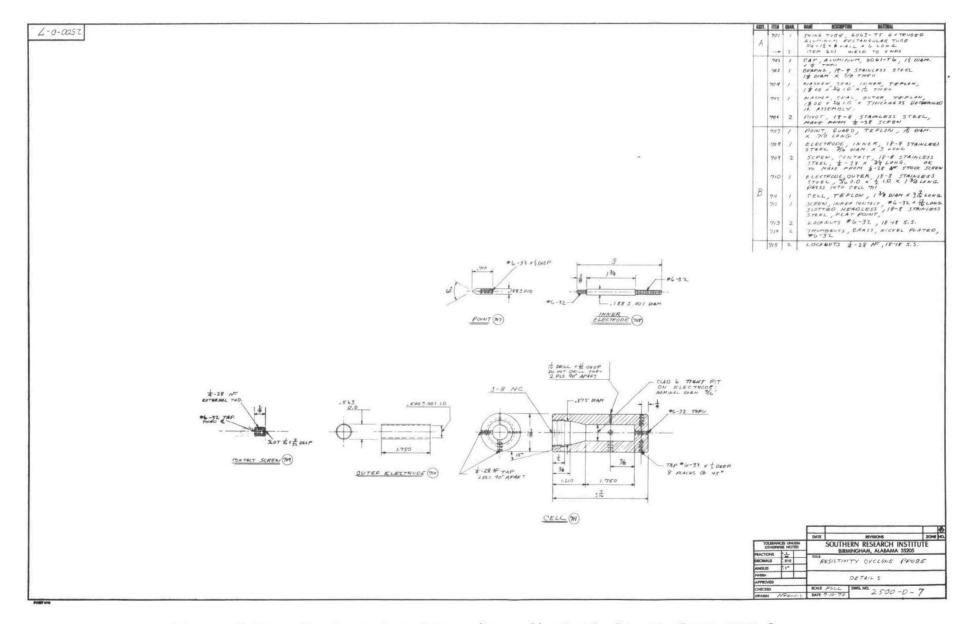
A. Engineering dimensions (inches) for Cyclone SRI-3.
